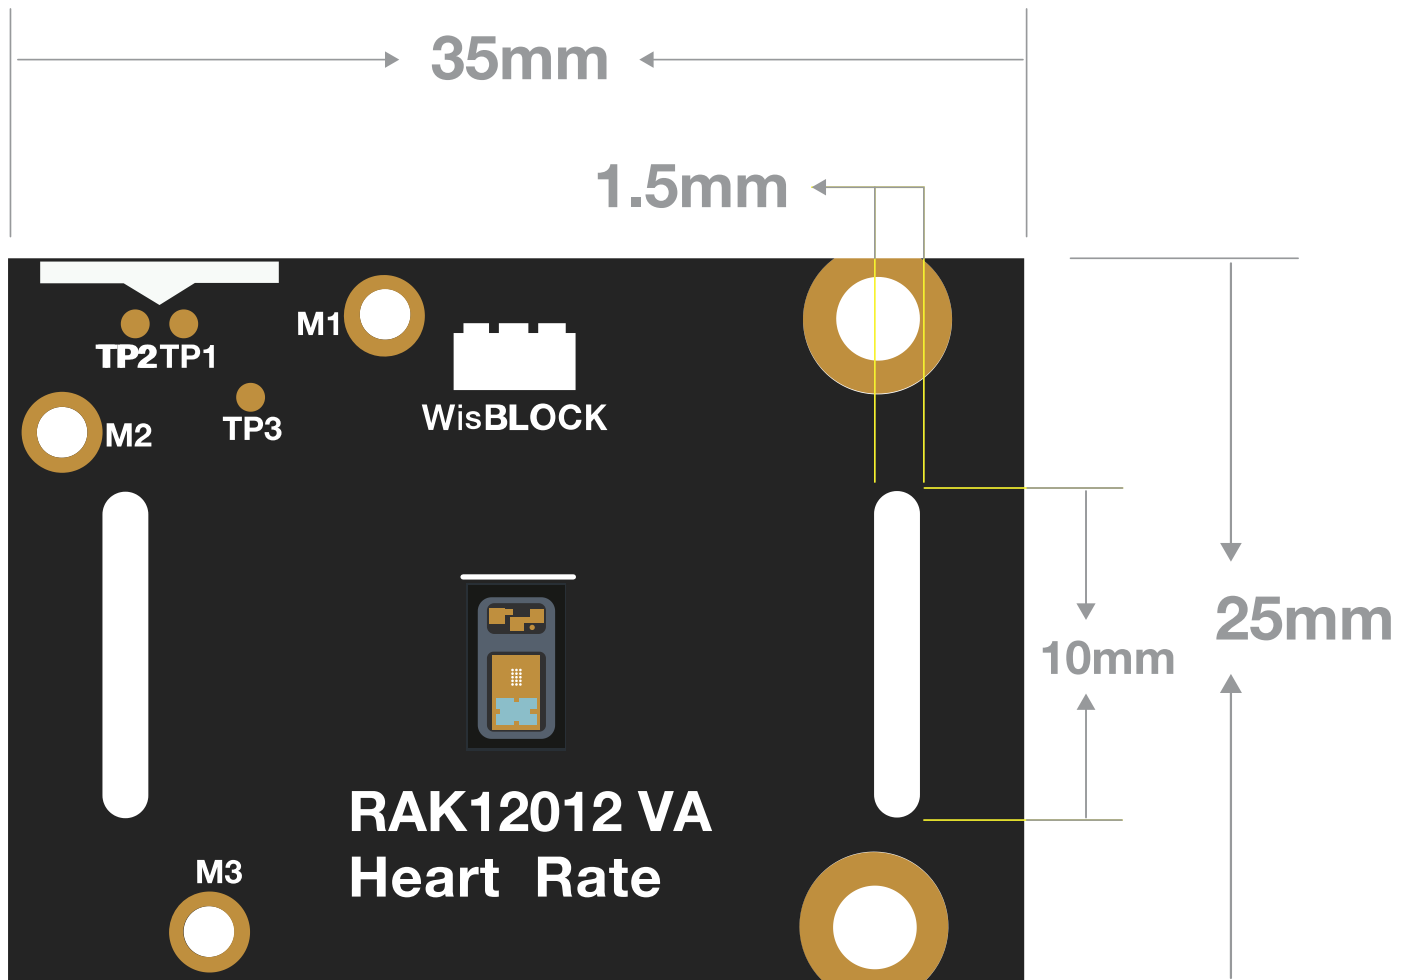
RAK12012 WisBlock Heart Rate Sensor Module Dimensions
